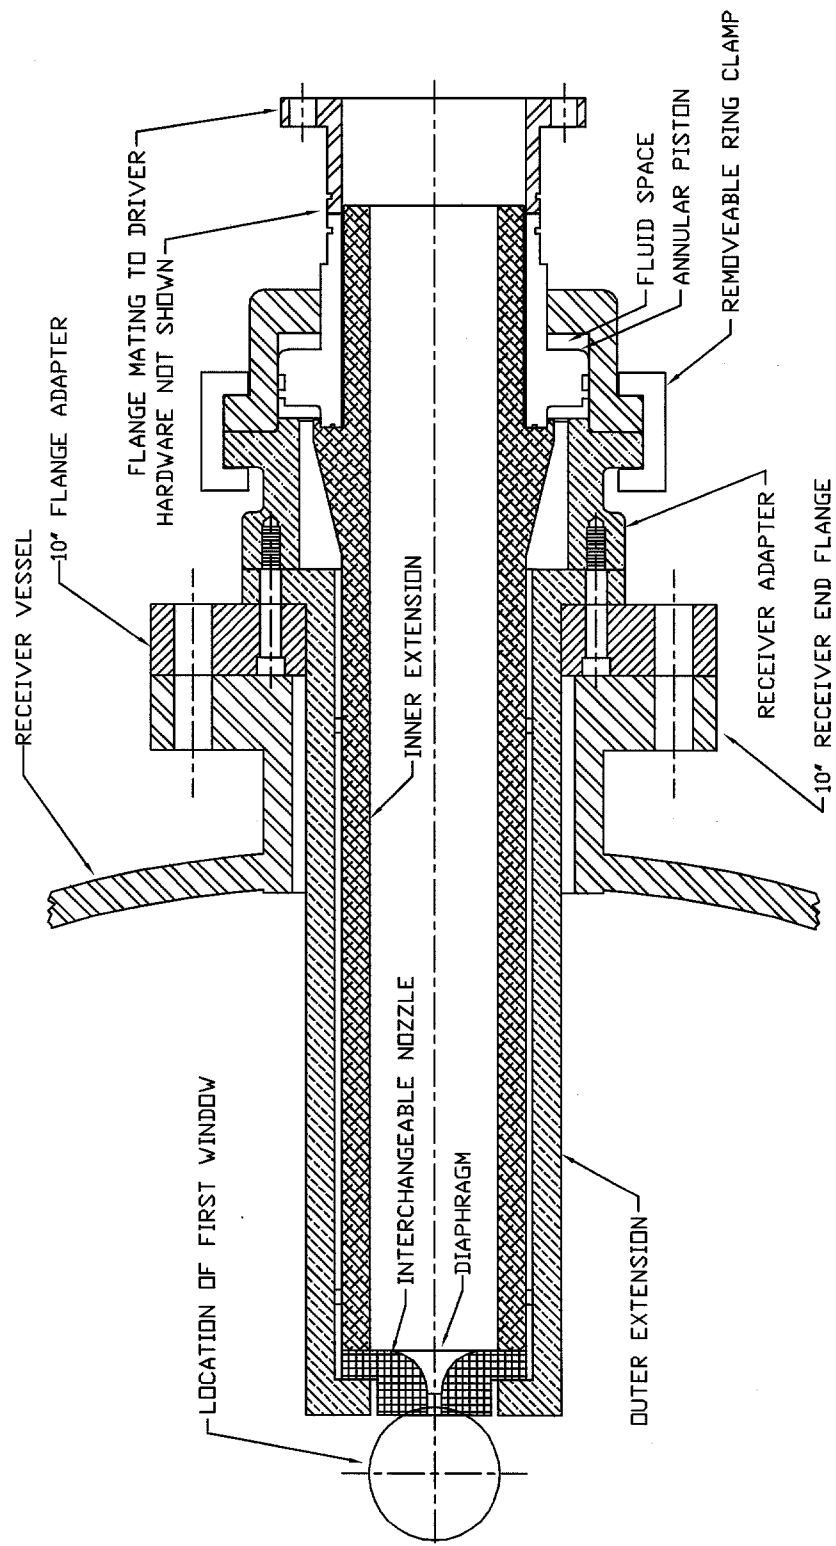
Cross section of hydraulic closure; receiver on left, driver on right.
